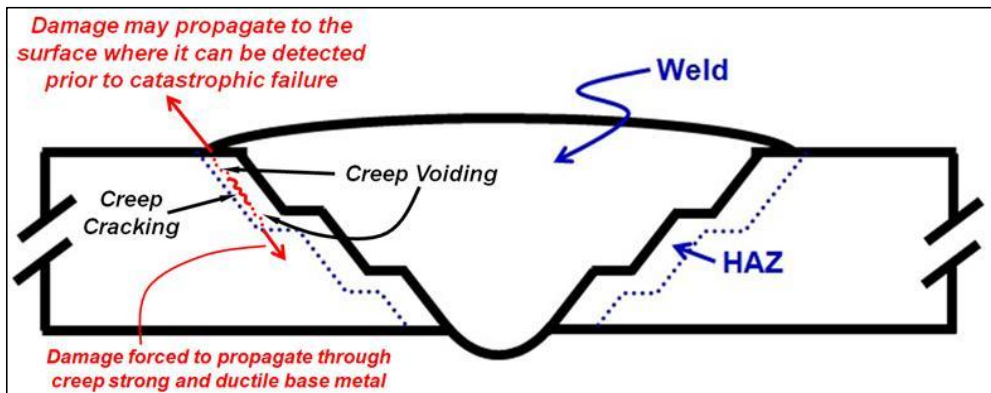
Design Philosophy for a Well-Engineered Step Weld for New Construction, Full Section Repair Welds, and Ferritic to Ferritic or Austenitic Dissimilar Metal Welds
